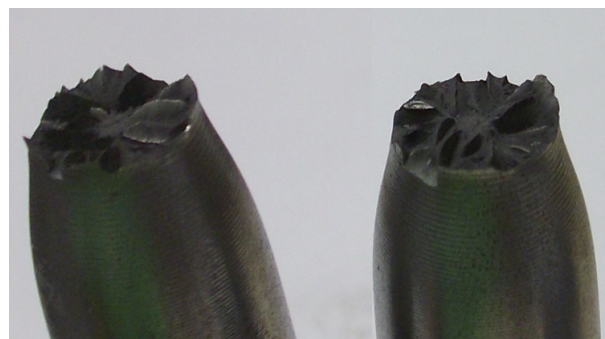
Fractured surface with fibrous pullout of A490 bolts due to tensile loading at 20°C
